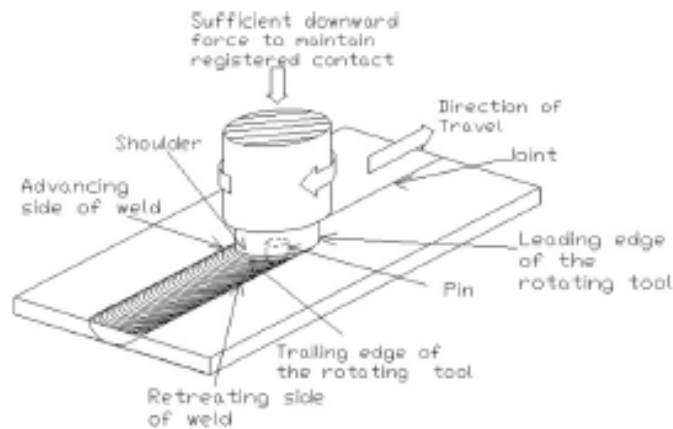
Outline of friction stir welding [Cook et al., 2004]
